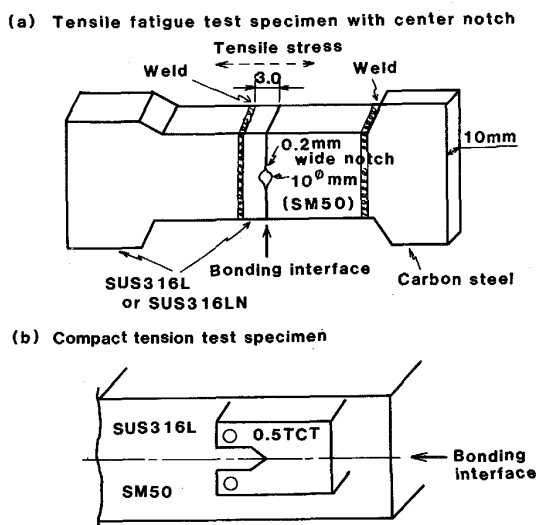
Test specimens for investigation of fatigue crack propagation behavior and for fracture toughness evaluation.
